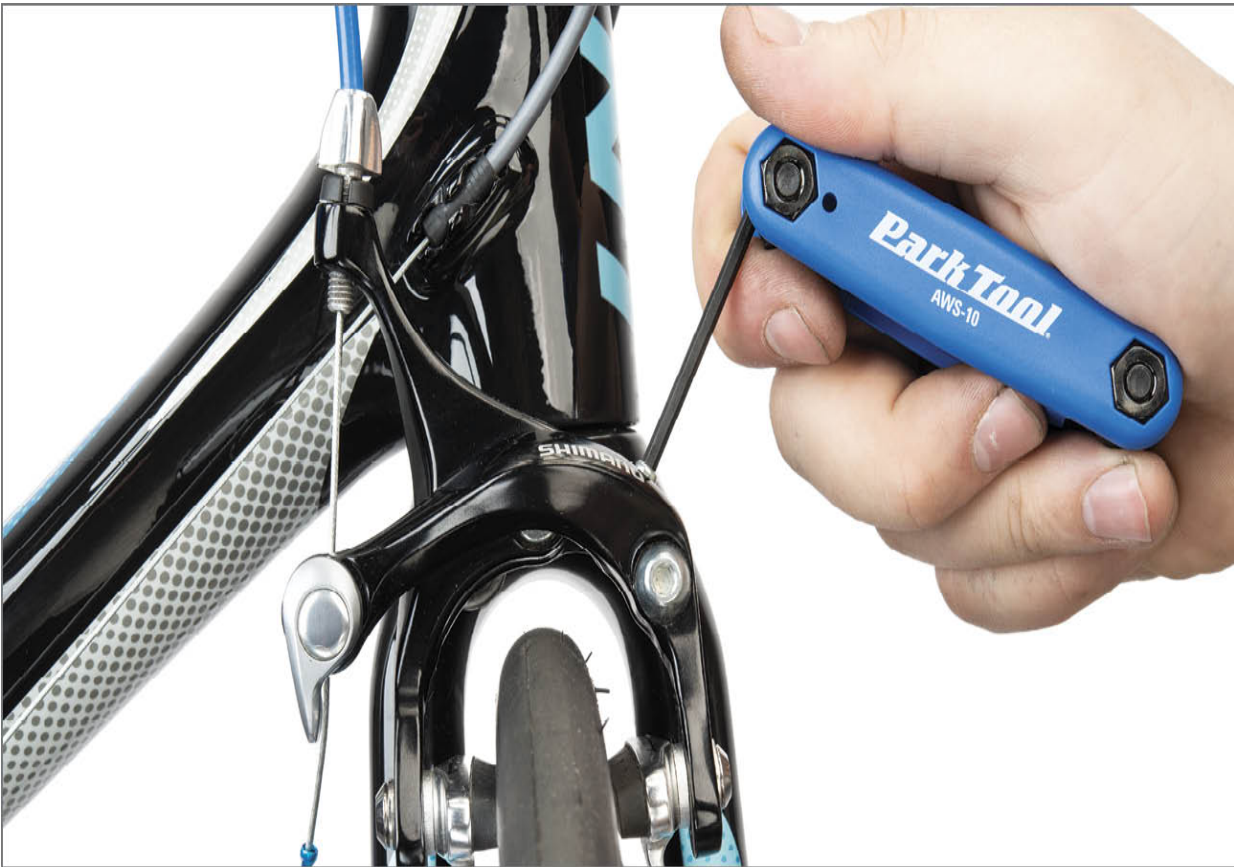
Center pads to rim with set screw in brake bridge
